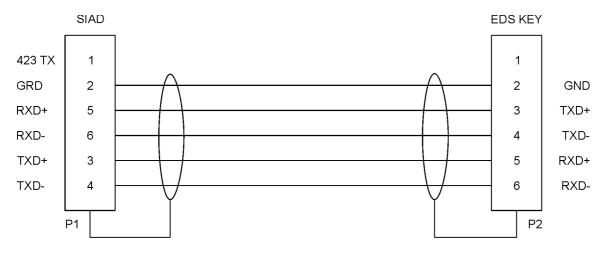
P/N 881284 W3E Cable Assembly (PALADIN)
